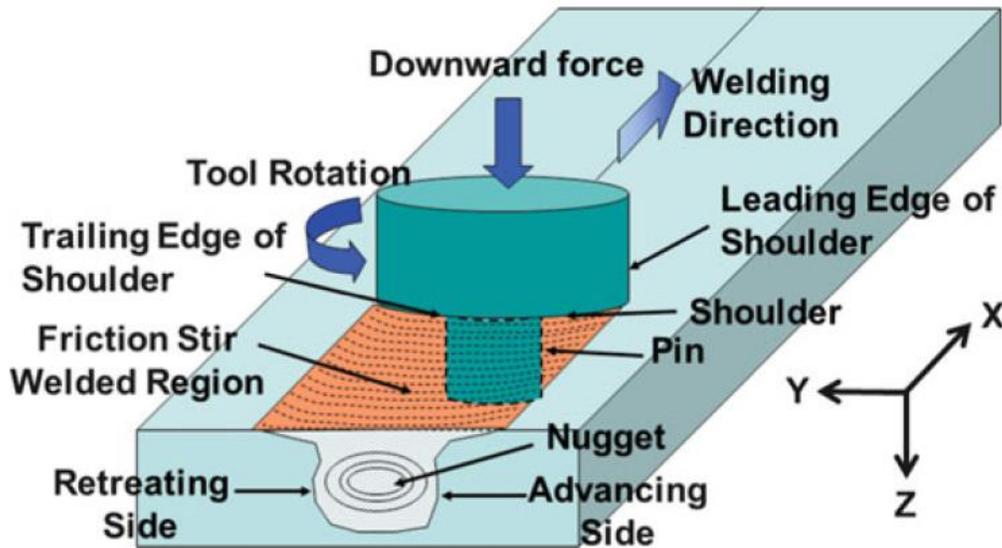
A schematic drawing of friction stir welding in a butt joint configuration [19]
